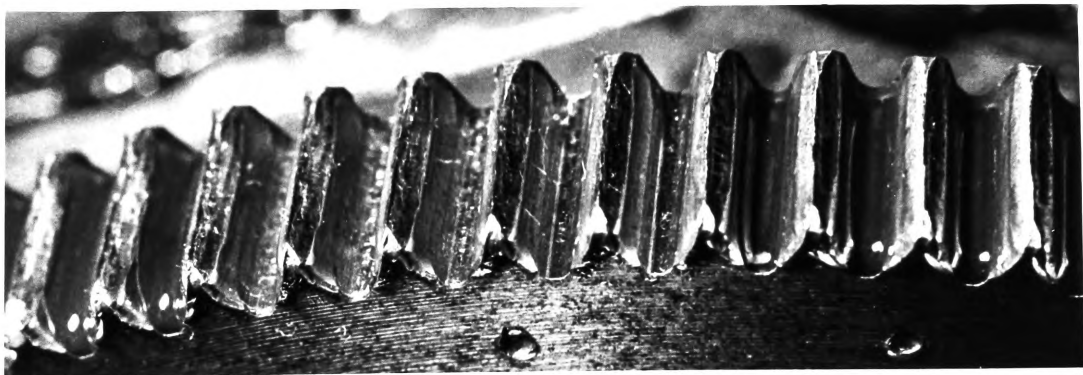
TEETH OF GEAR SET 4 WHEEL - 2521 HOURS
